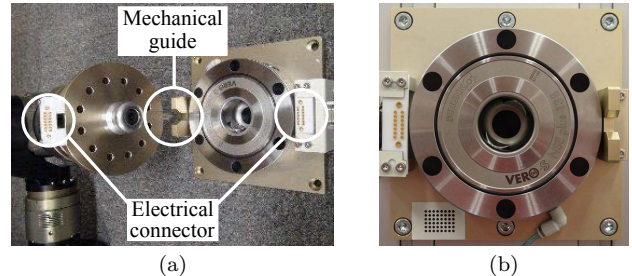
Mechanical and electrical interfaces for the arm, the fixture module: (a) mechanical and electrical connections between the arm and the fixture module, and (b) the front view of the fixture module and the circles grid board.
